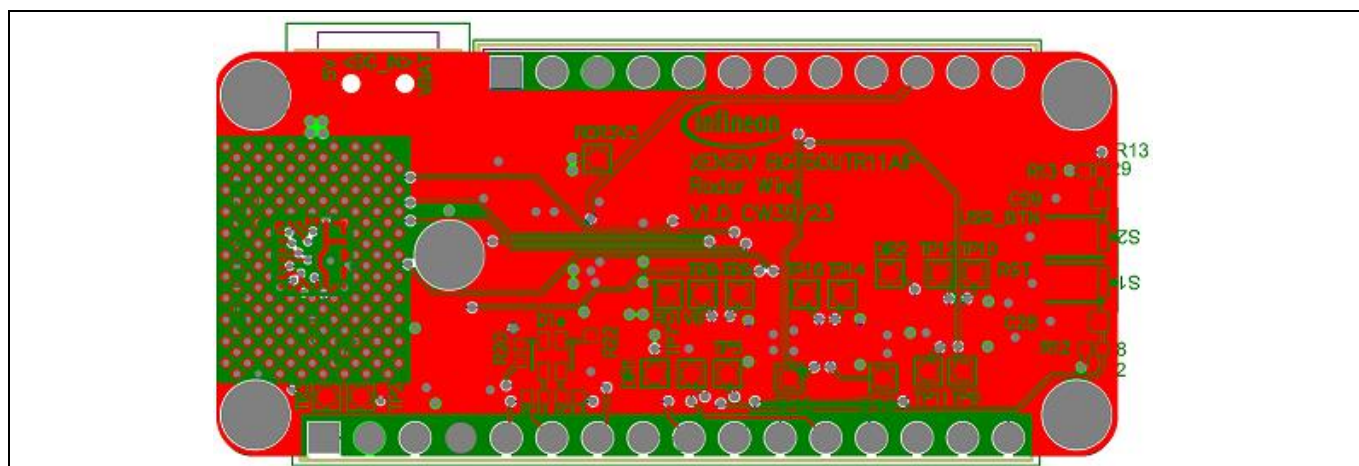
PCB layout of XENSIV™ BGT60UTR11AIP Radar Wing board
